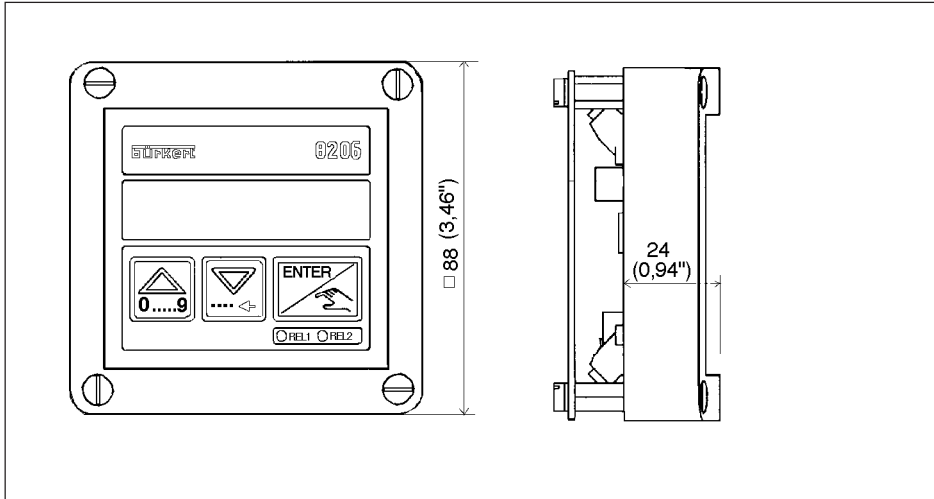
Dimensions redox transmitter type 8206 panel version
